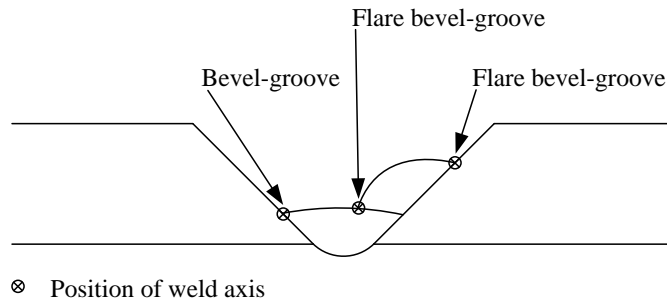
For a butt-joint with two weld beads three weld axes are defined as illustrated. The root bead is considered as plane on the weld face side.
